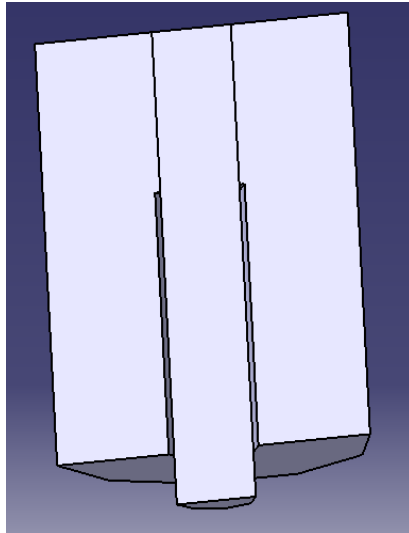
Isometric view pin $\phi 1.5$ mould side.
